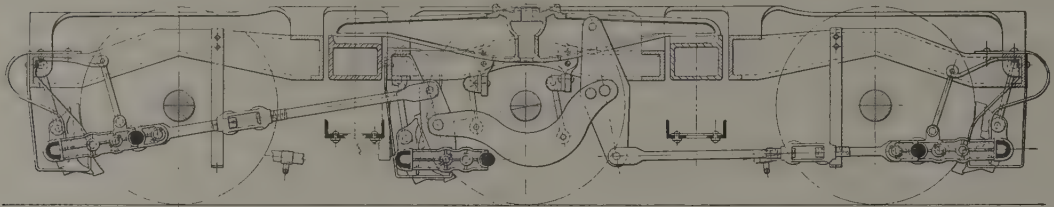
Arrangement of Brake Rigging for Triple Brakes on Six-Wheel Passenger Car Trucks.
